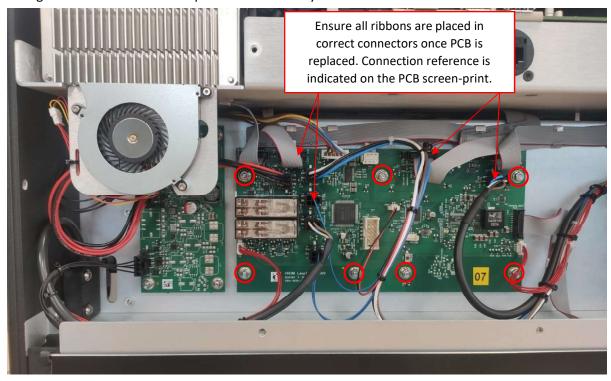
7x (5.5mm Driver) OVD PCB retaining nuts.
